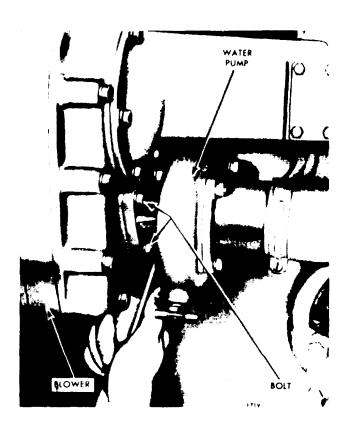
F-4. Loosening Inner Pump-to-Blower Bolt with Tool J 4242
